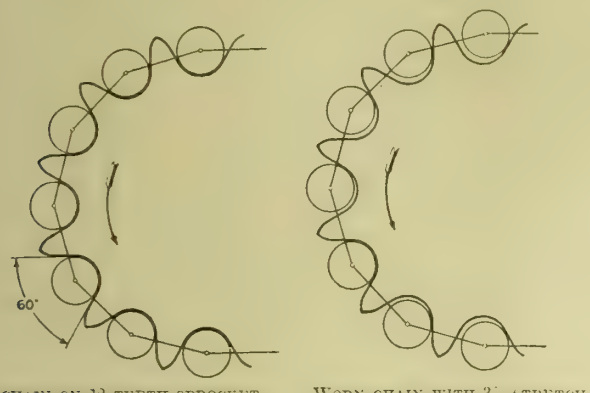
ROLLER CHAIN TOOTH FORM.
